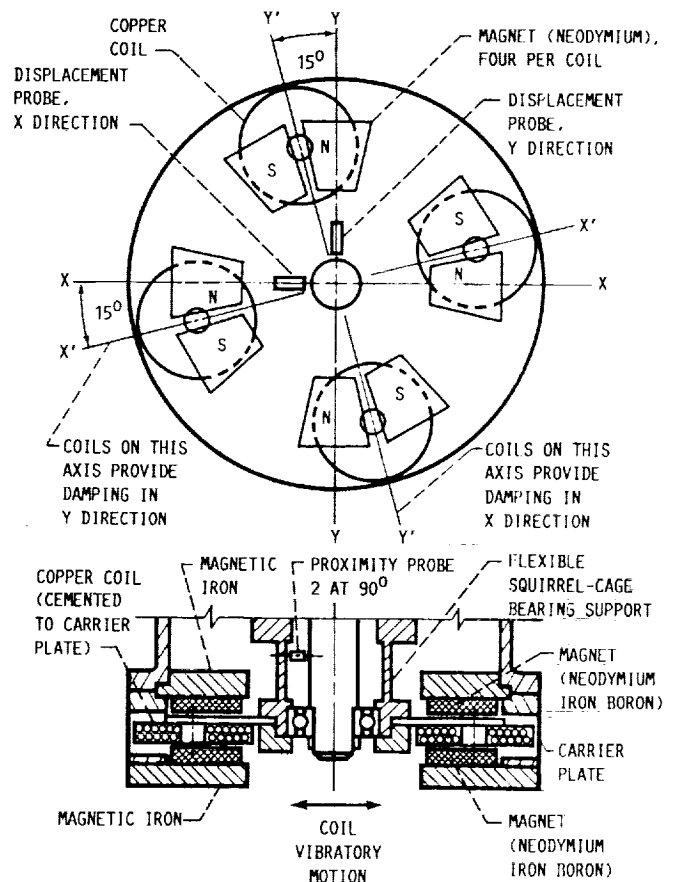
Sketch of electromagnetic damper showing arrangement of copper coils, magnets, and displacement probes.
